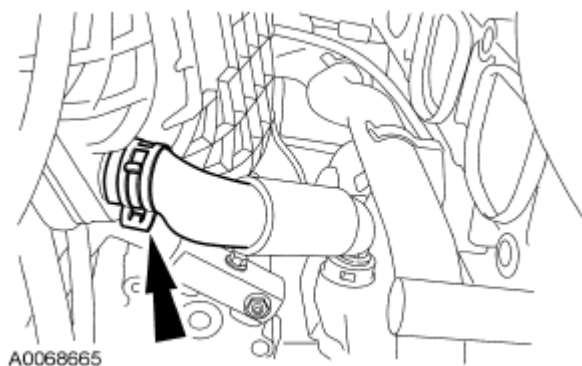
Locating Positive Crankcase Ventilation (PCV) Hose
